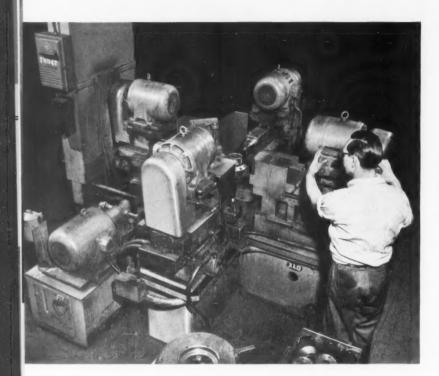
Horizontal, four-way, rotary indexing machine of the type employed for drilling and boring vane shaft holes along split line of carrier assembly.
